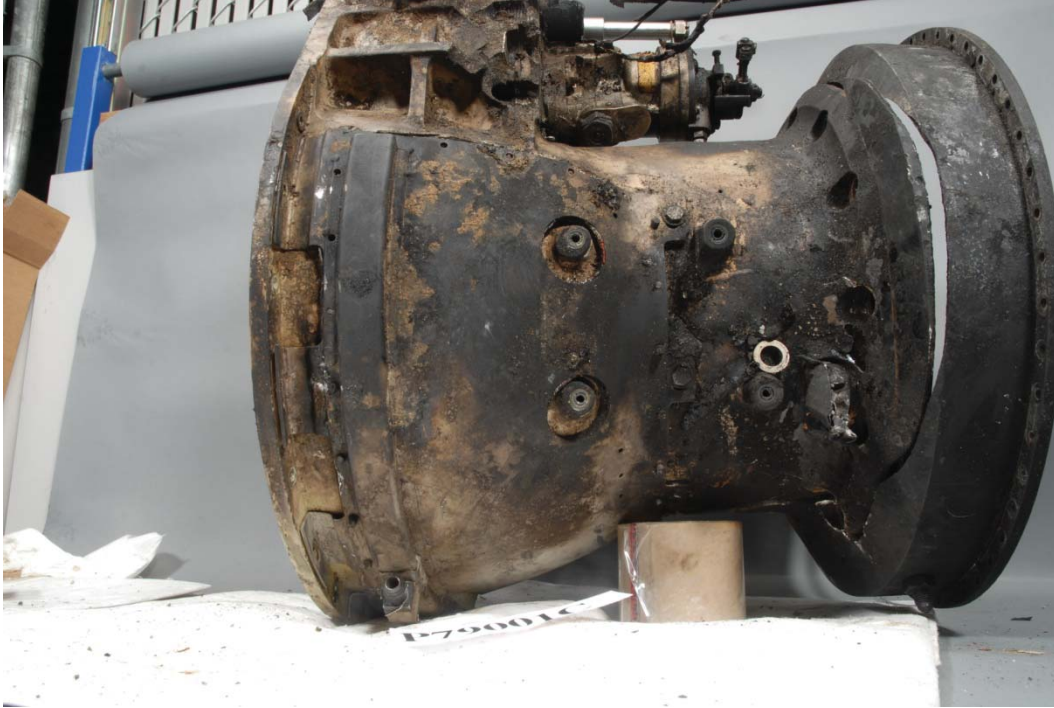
P-79001C, Accessory Drive Housing (Gearcase)
